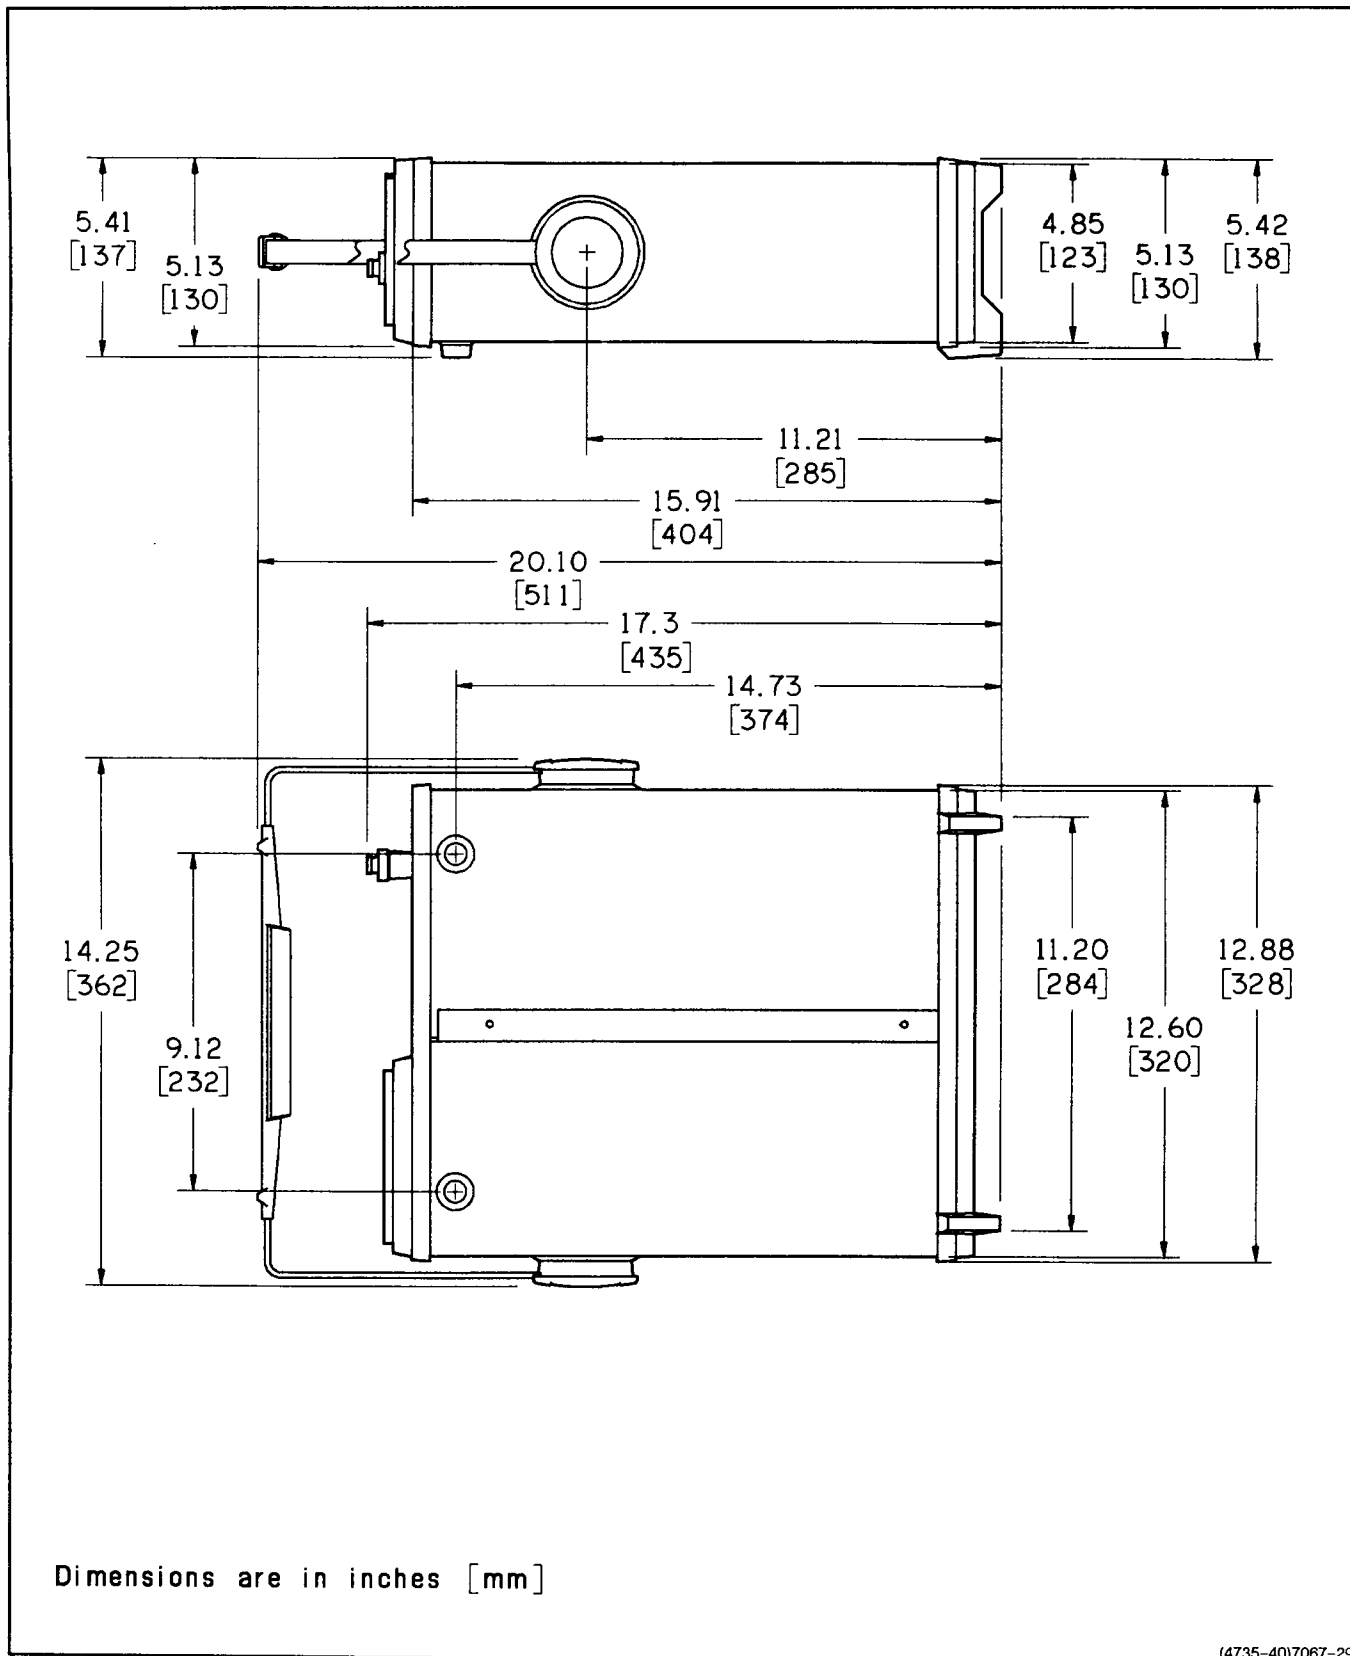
Physical dimensions of the 2224 Oscilloscope.
